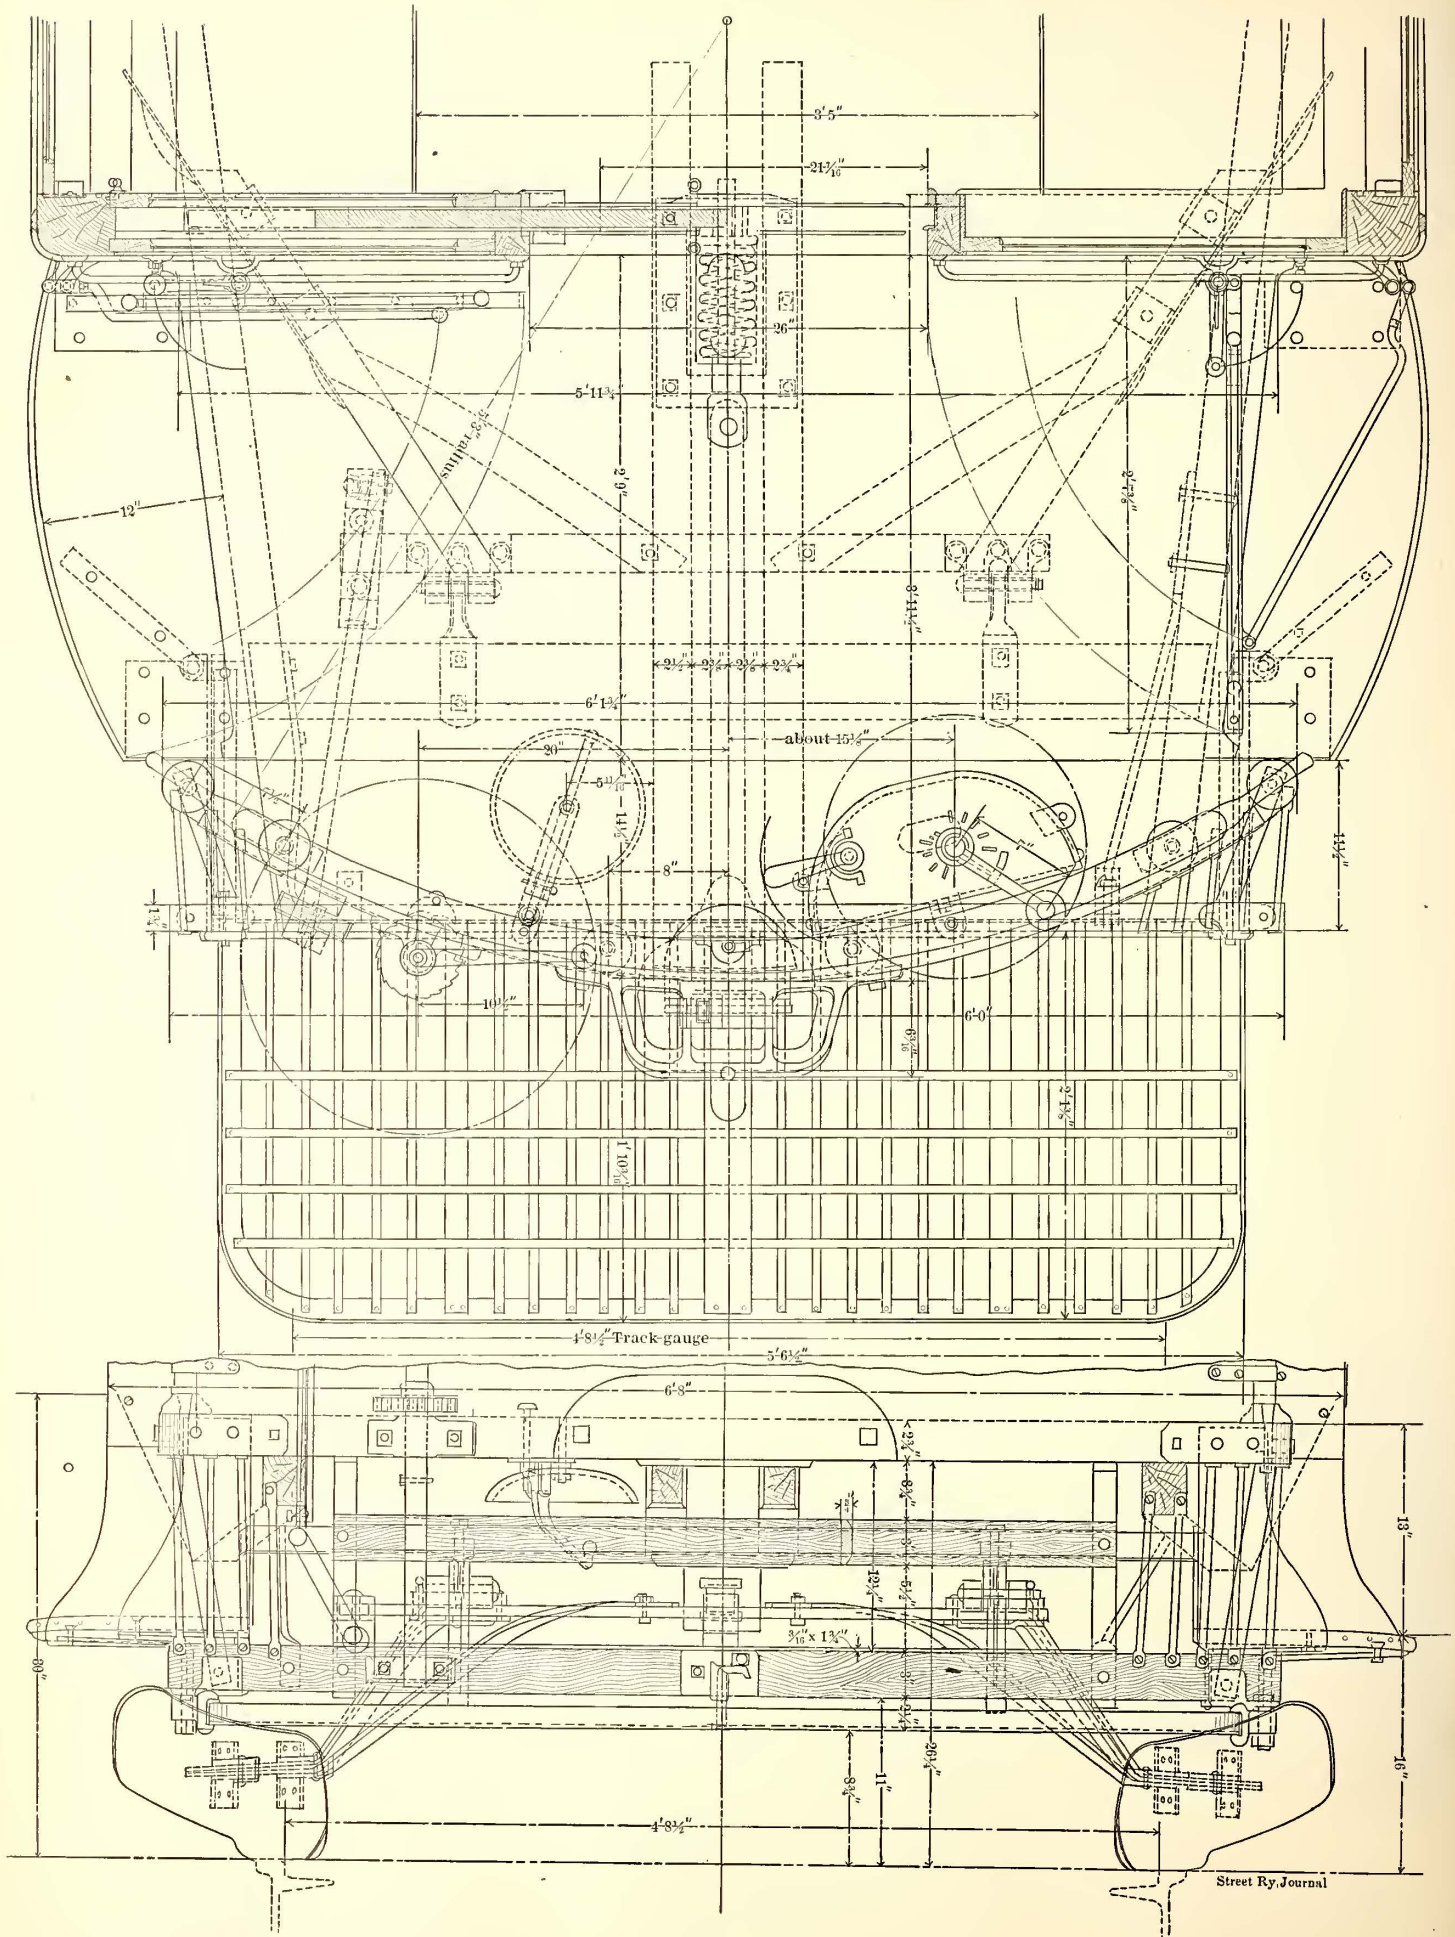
PLAN AND CROSS SECTION OF PLATFORM OF 25-FT. BOX CAR ILLUSTRATED IN FIG. 10
